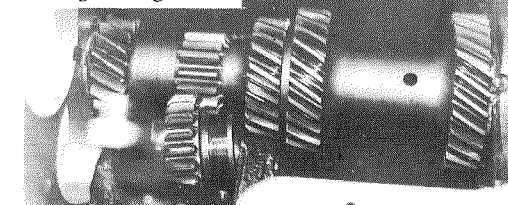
Offer the mainshaft into the box and fit the first gear thrust washer (4 grooves each side), followed by the rear mainbearing complete with outer clip. Again I fitted a new bearing.
